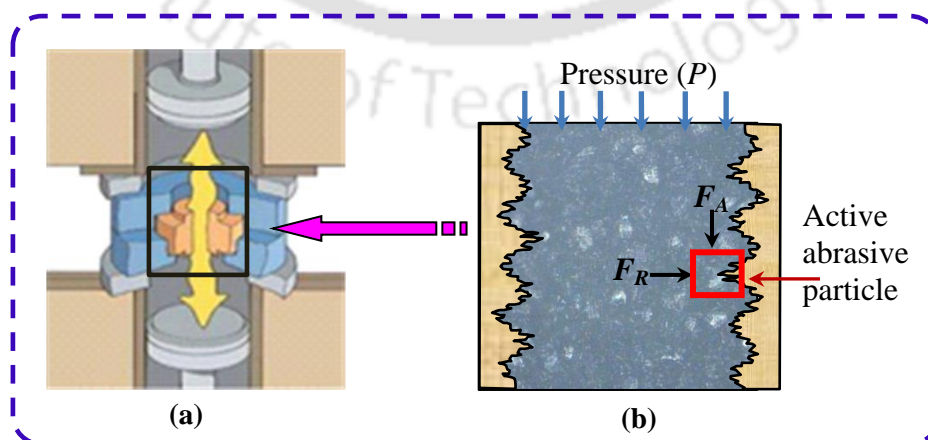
Schematic diagram showing (a) tooling (b) various finishing forces acting on the medium during its extrusion through the workpiece passageway.
